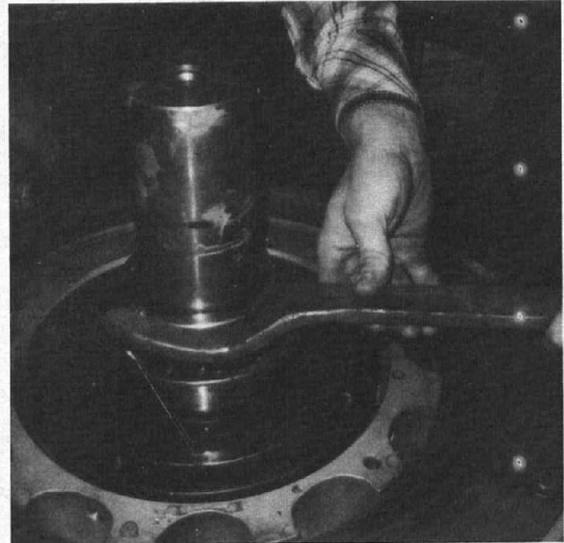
Using a spanner wrench to remove the precision bearing retainer ring and nut.
